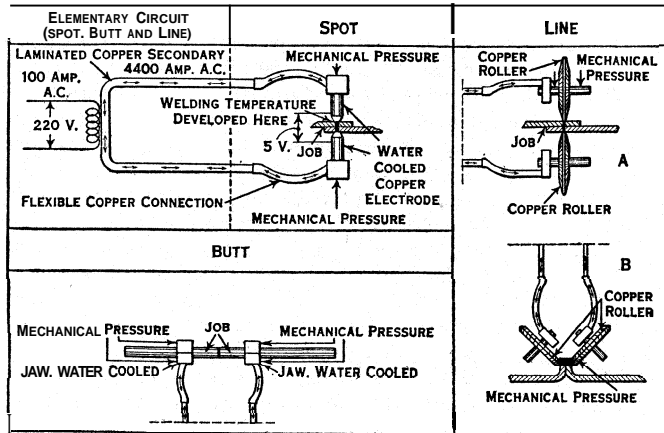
DIAGRAMS OF CIRCUITS OF VARIOUS WELDING MACHINES
